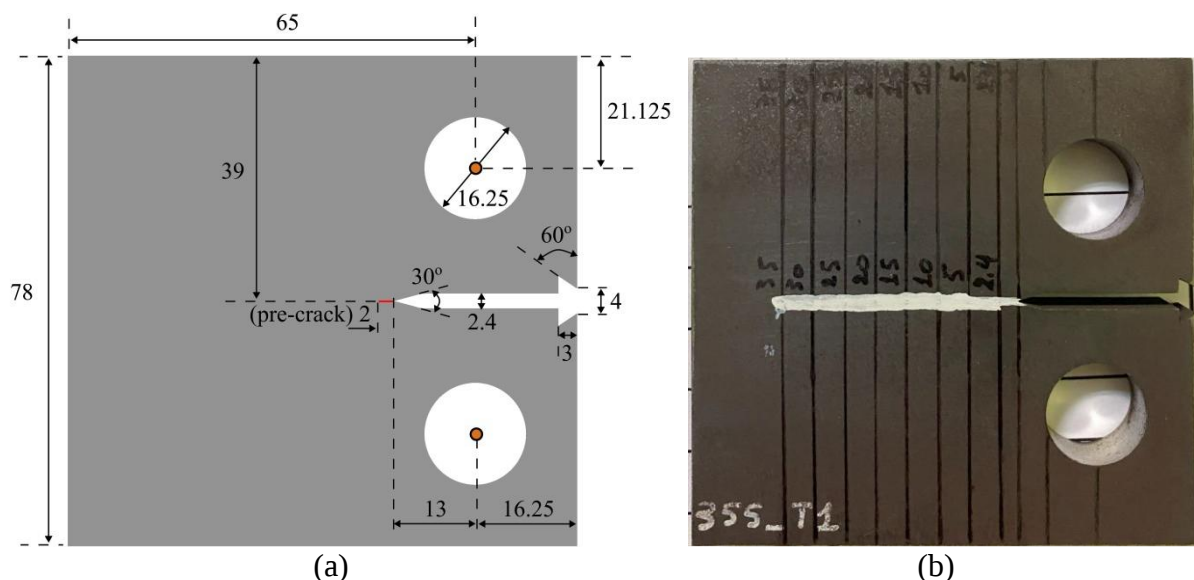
(a) Finite element model, (b) test C(T) specimen, following the ASTM E647-00 standard [8]; the dimensions are in mm.
